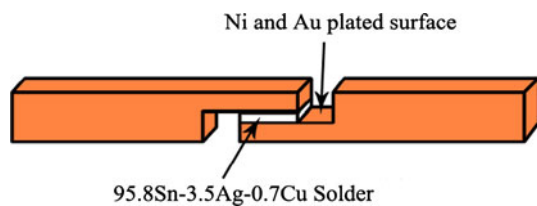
Schematic of fabrication of shear-lap solder joint specimen.
